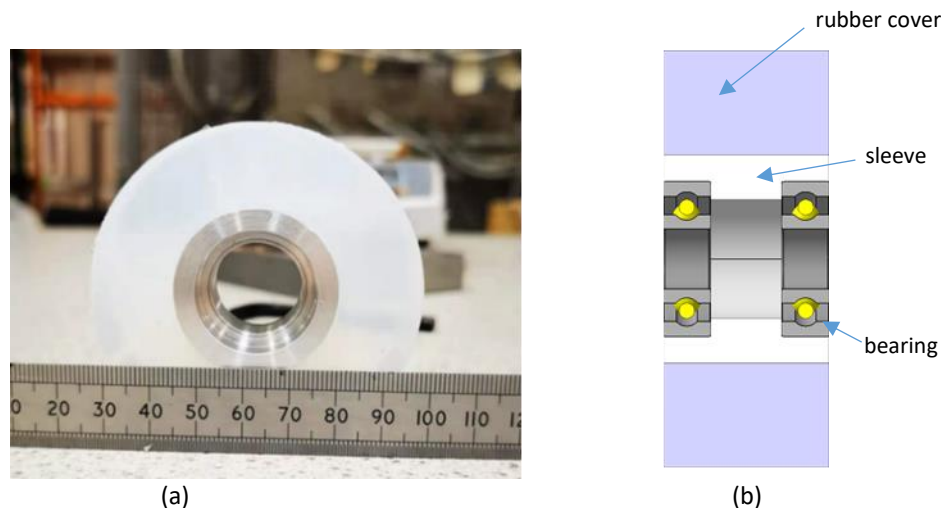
Compaction roller (a) Manufactured roller (b) Cross-section view of roller in CAD
